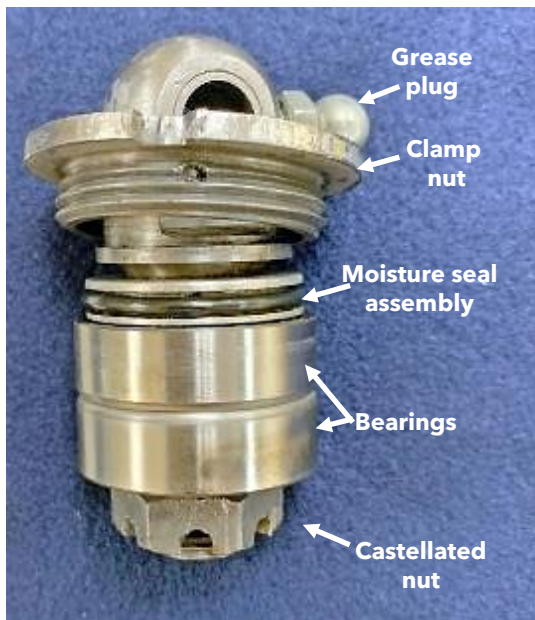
Partially disassembled eye bolt assembly where the clamp nut was pulled up to expose the moisture seal assembly (ring with elastomer seals).
